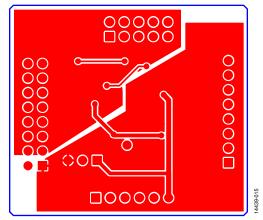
EVAL-AD5311RDBZ Daughter Board Bottom Side Routing
